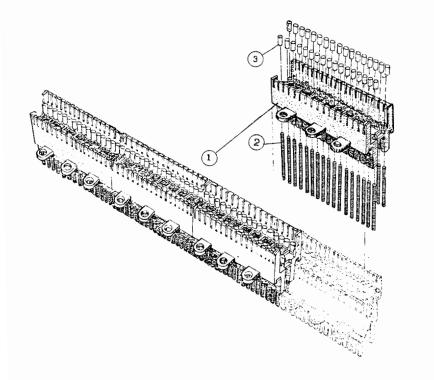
Actuator and Hammer Bank Assembly (Sheet 3 of 3)
